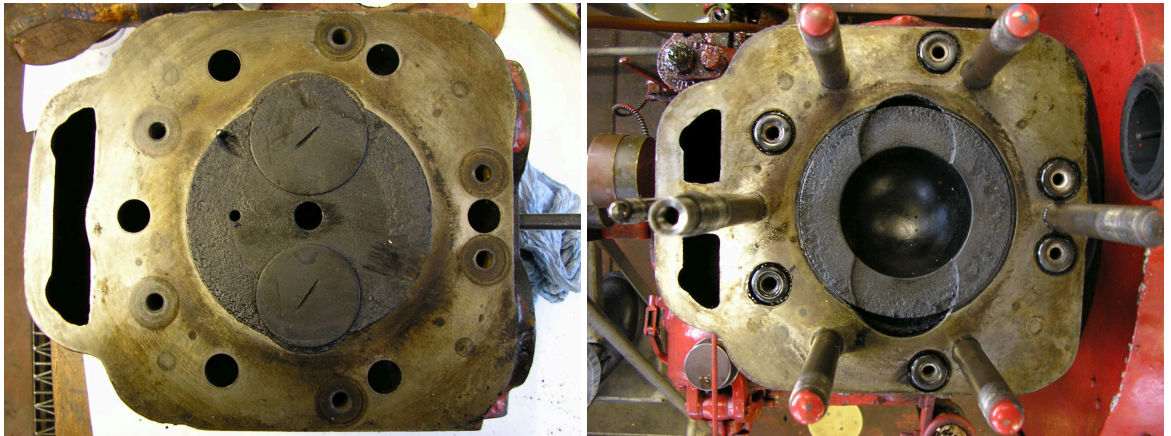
Gardner 1L2 cylinder head (left picture) and piston head (mounted within engine block) prior to cleaning (right picture)
